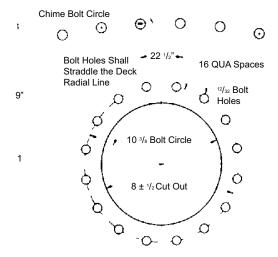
Bolting Pattern for 8-in. Circular Thief Hatches, Pressure-relief, and Vacuum-relief Valves
